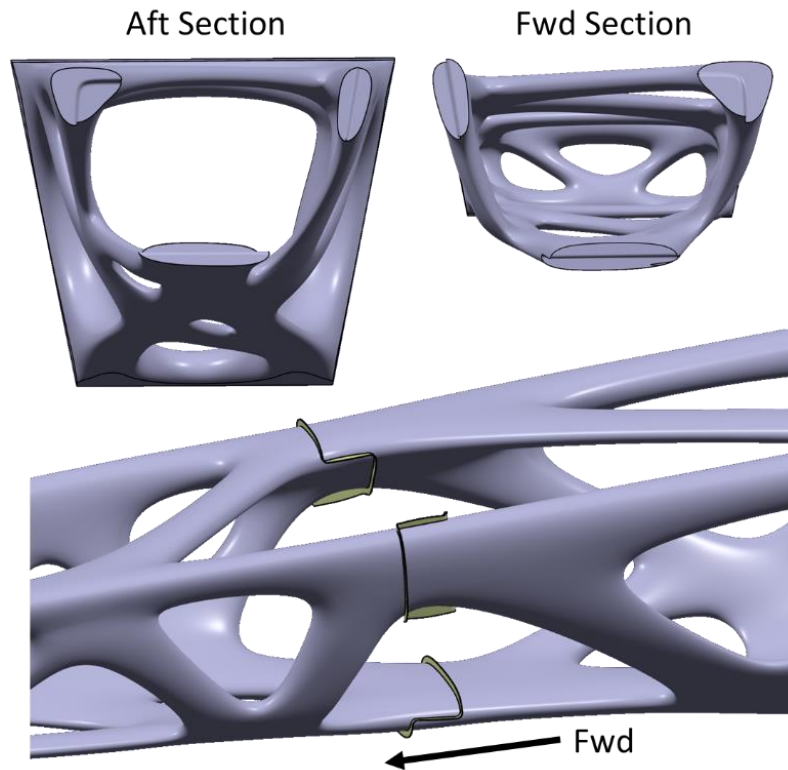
Top) Aft and forward views of the three joint locations, Bottom) Rotated view of the assembled beam at the mid-span joint location with the 3D splitting surfaces shown.
